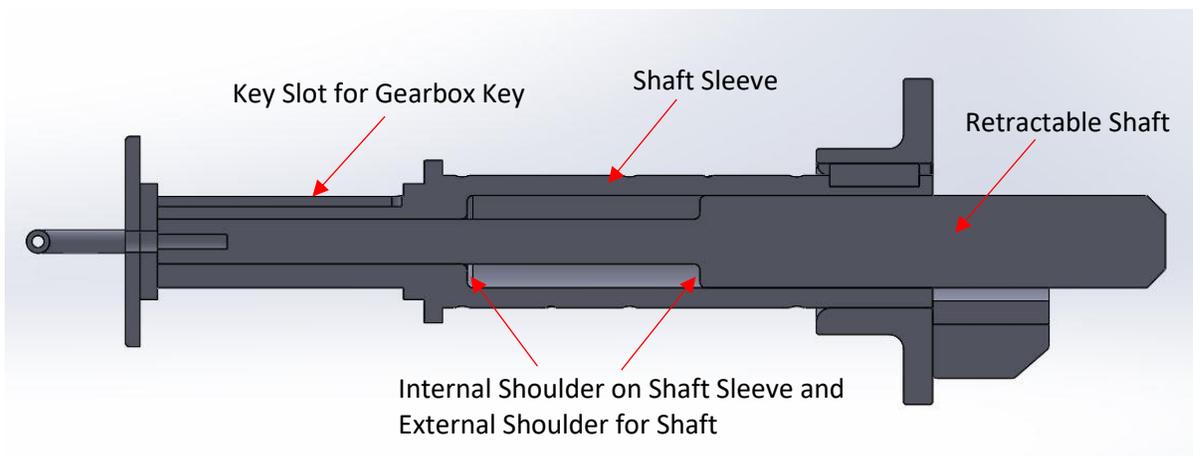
Drive End Iteration #2, Retractable Shaft Assembly, Cross-Sectional View
